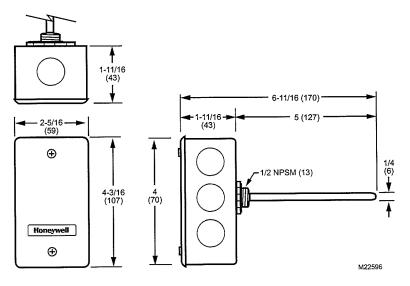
C7021D, C7023D, C7031D, C7041D dimensions in in. (mm)
